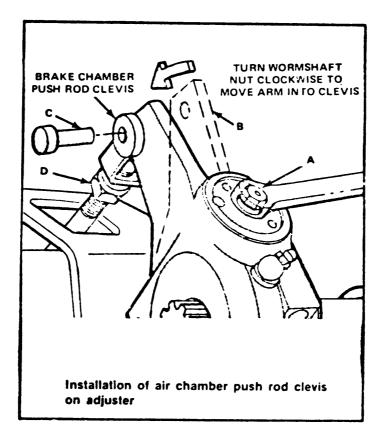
Installation of chamber Push Rod Clevis on Adjuster
